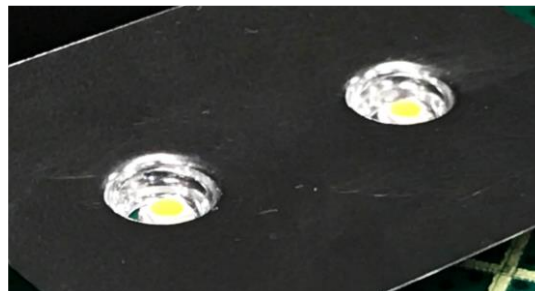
Draw forming technology for use as a UV-LED reflector.
